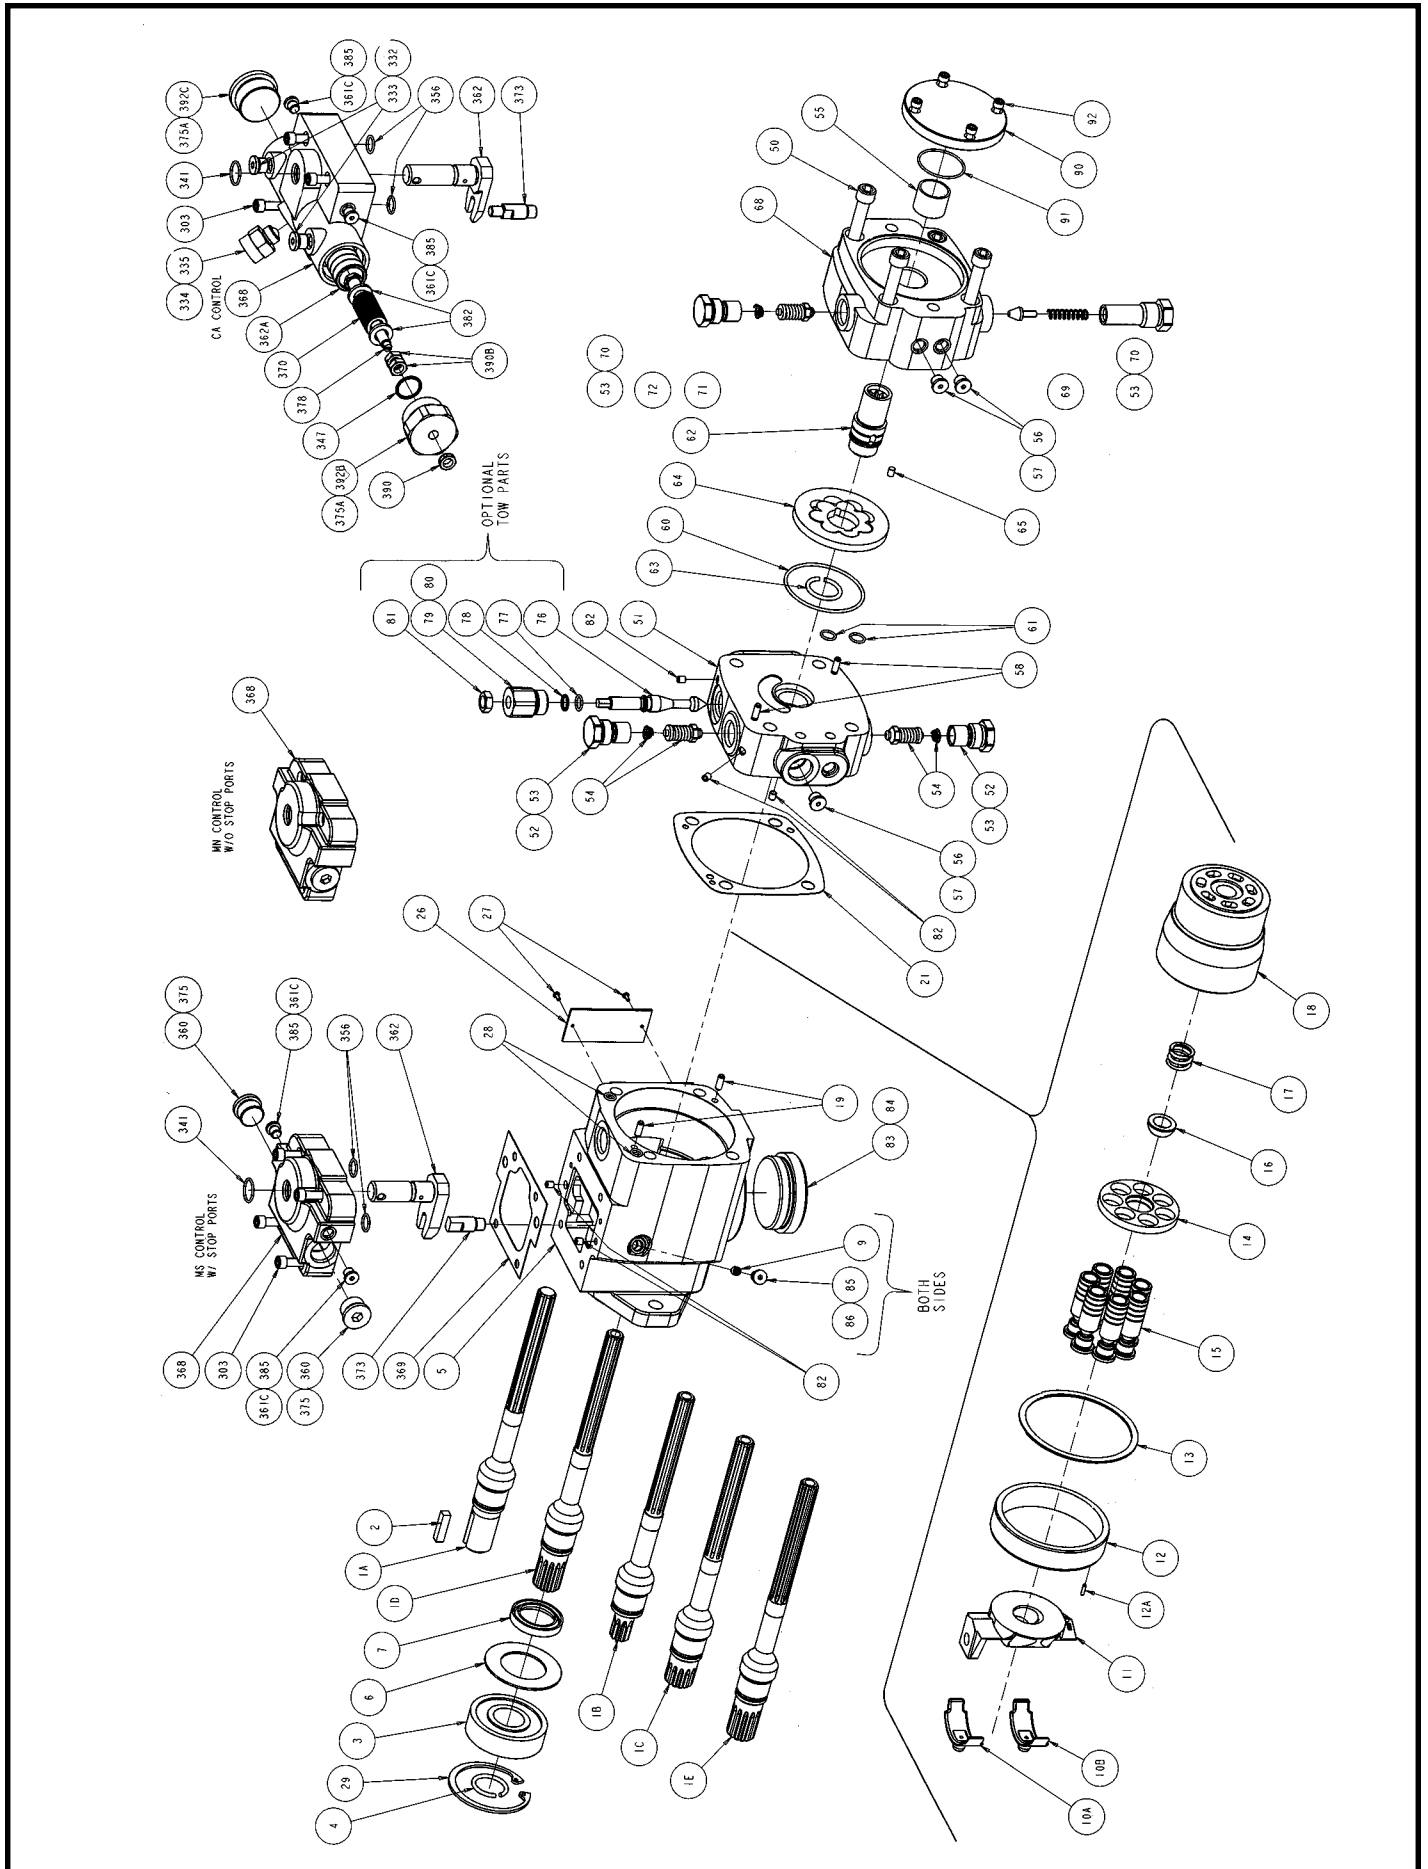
Exploded Parts Drawing (E51837-300 sh. 1).
